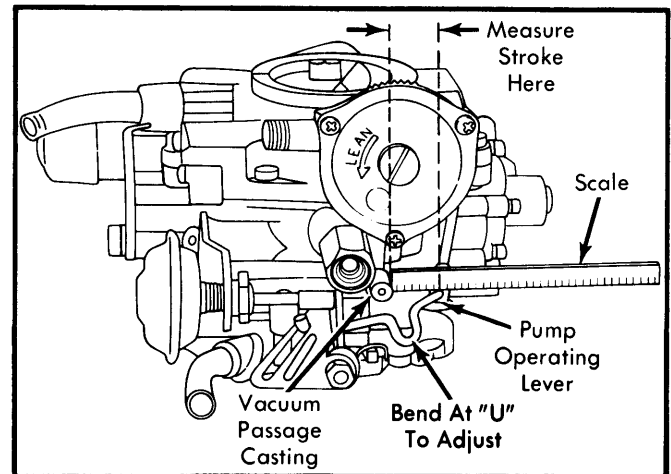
Adjusting Accelerator Pump Piston Stroke
